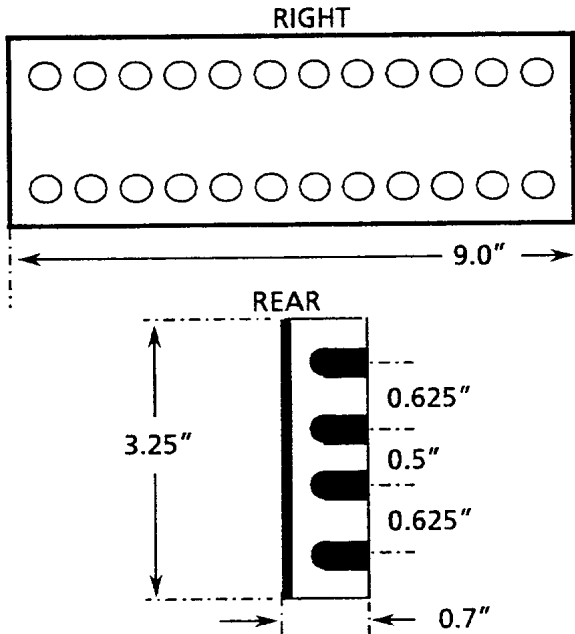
Dimensions used for rack-mounting the 1780R-Series Video Measurement Set
